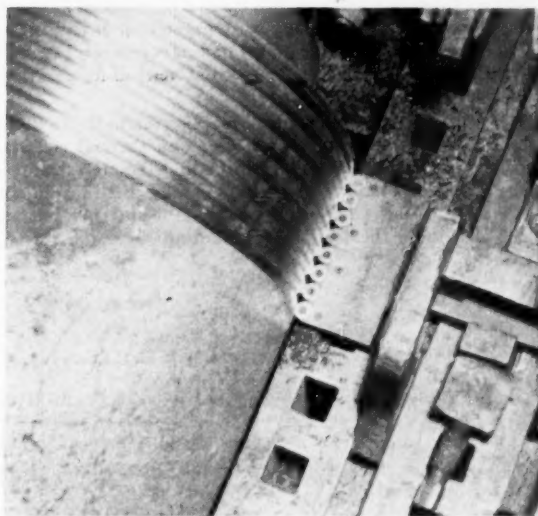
ROUGHING CHILLED CAST-IRON ROLL, 75 SCLEROSCOPE HARDNESS, WITH K6 MULTIPLE-BUTTON TOOL
